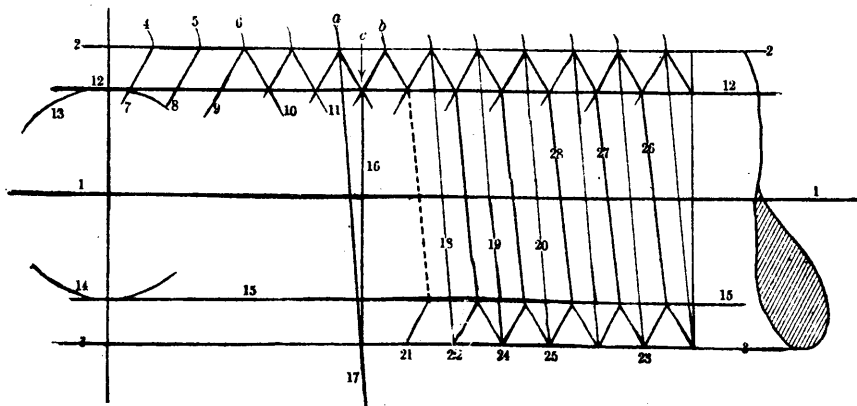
ORDER OF DRAWING THE LINES TO REPRESENT A V THREAD.
